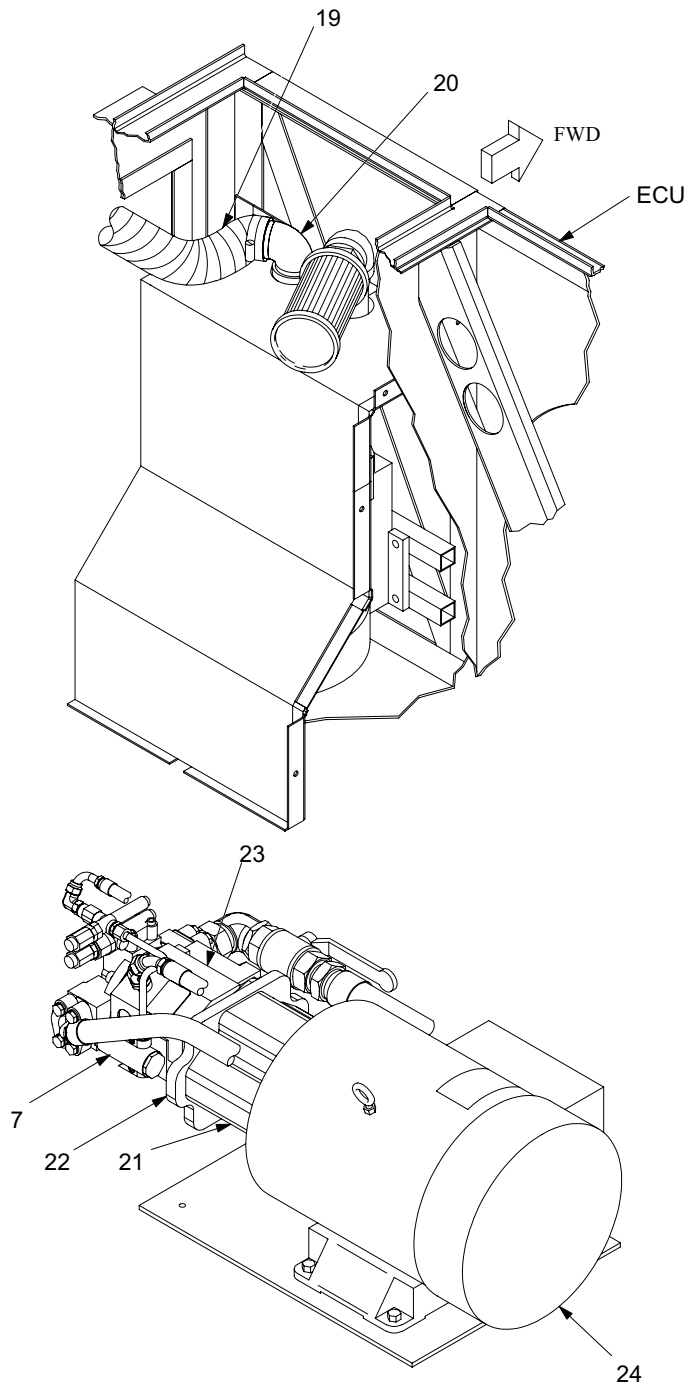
Hydraulic Manifold Valve Replacement (Sheet 2 of 3)
